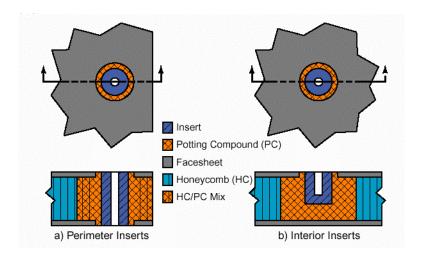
Carbon-Carbon Radiator Panel Insert Design
